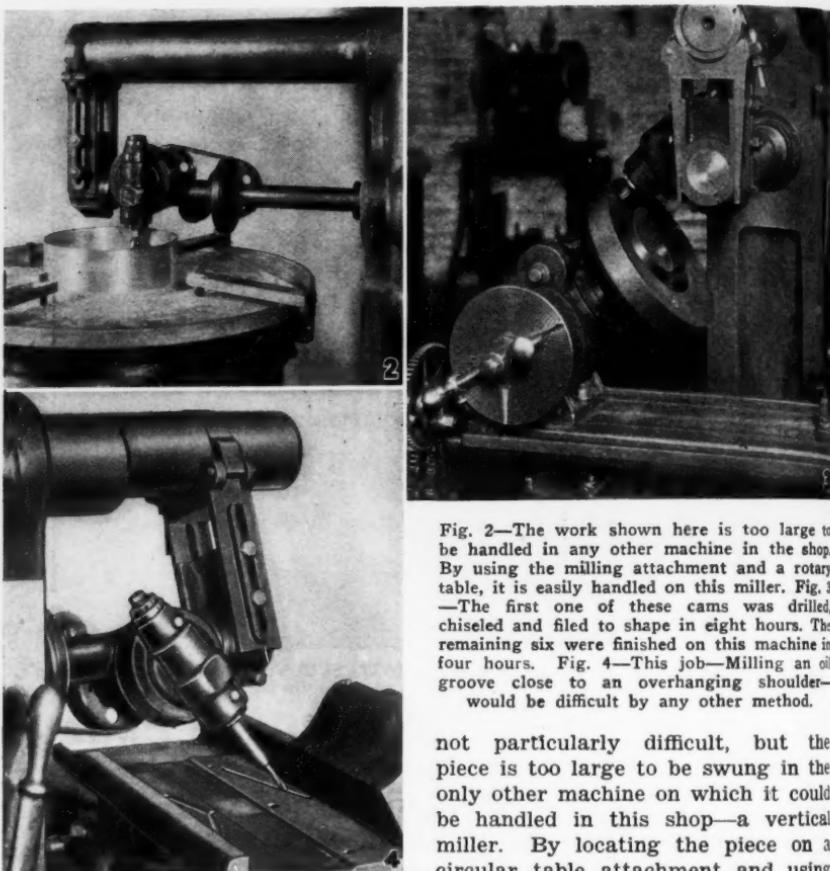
The work shown here is too large to be handled in any other machine in the shop. By using the milling attachment and a rotary table, it is easily handled on this miller. Fig. 3—The first one of these cams was drilled, chiseled and filed to shape in eight hours. The remaining six were finished on this machine in four hours. Fig. 4—This job—Milling an oil groove close to an overhanging shoulder—would be difficult by any other method.
